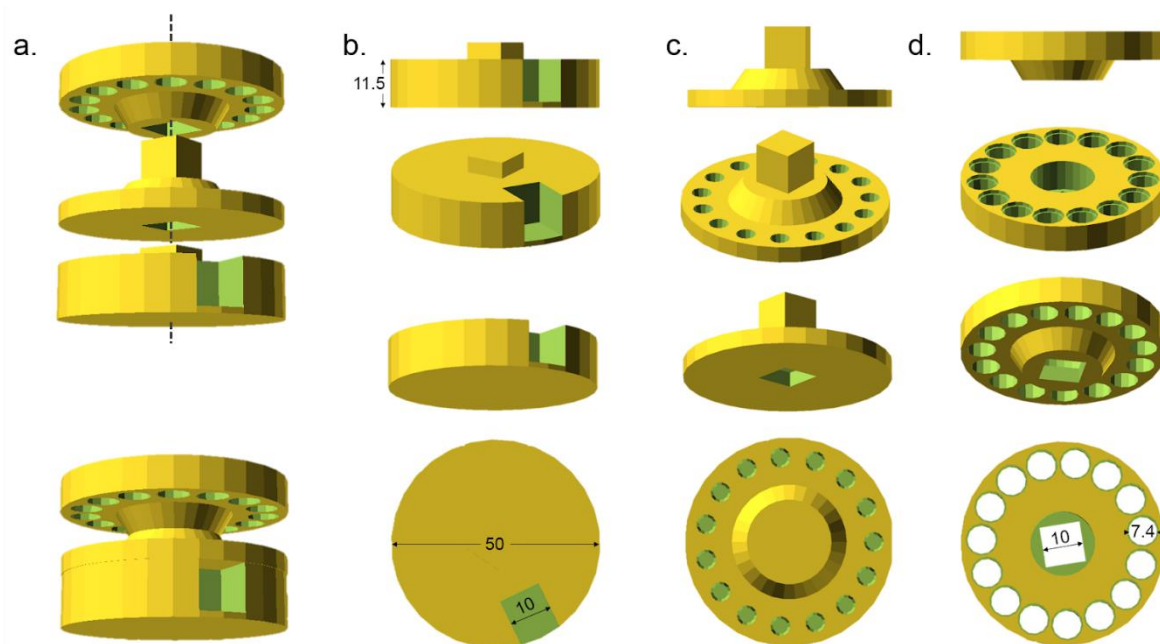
OpenSCAD design of the 3D printed sample tray. a. The sample tray consists in the assembly of 3 parts. b. Magnet holder (bottom part). b. Middle part. c. Top part. The device was printed using PLA printing filament (30 g = ~2€)
